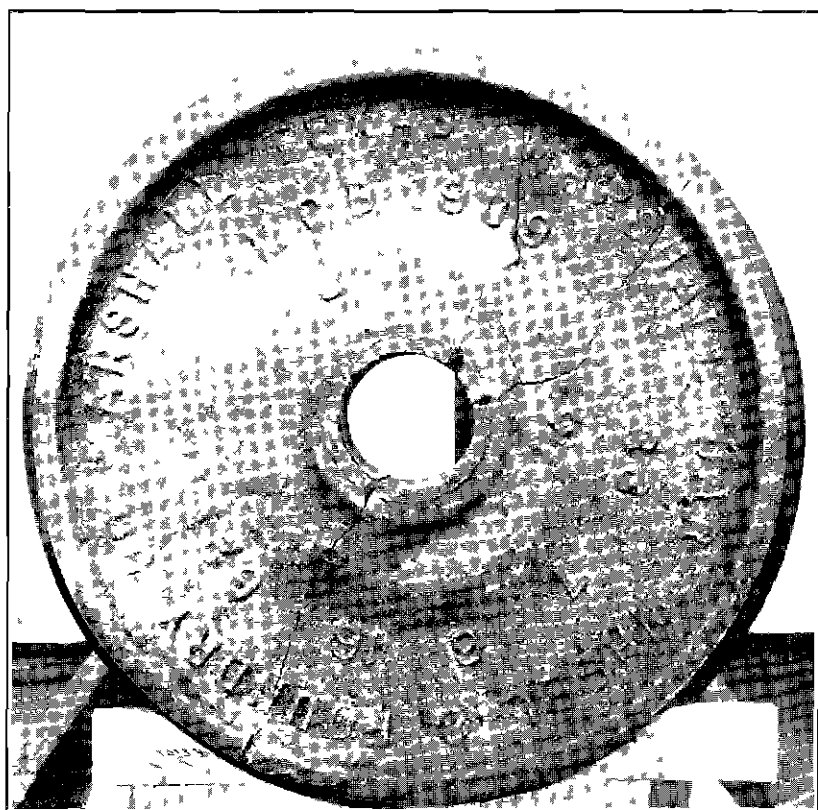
Pioner wheel No. 949, outside face. Shown, faded lines of rupture, detaching "two main fragments" with section of "full thickness".
